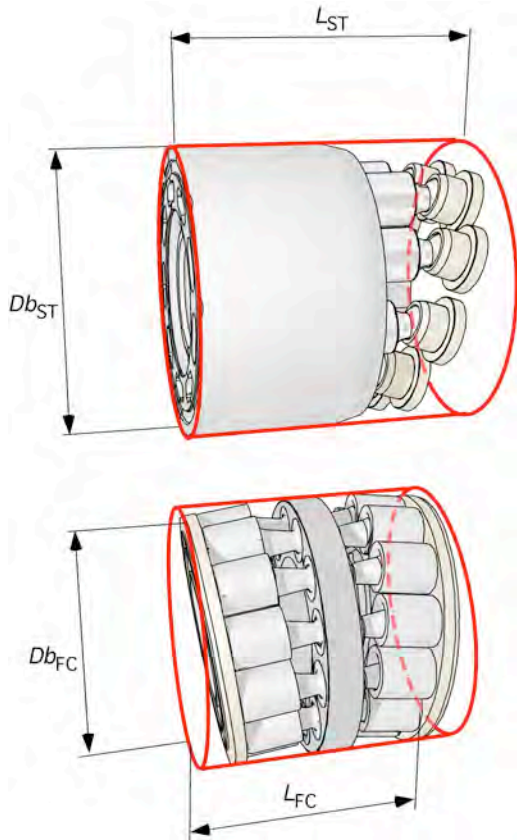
Definition of the volume VR of the rotary group of an in-line slipper type machine (above) and a floating cup machine (below)
